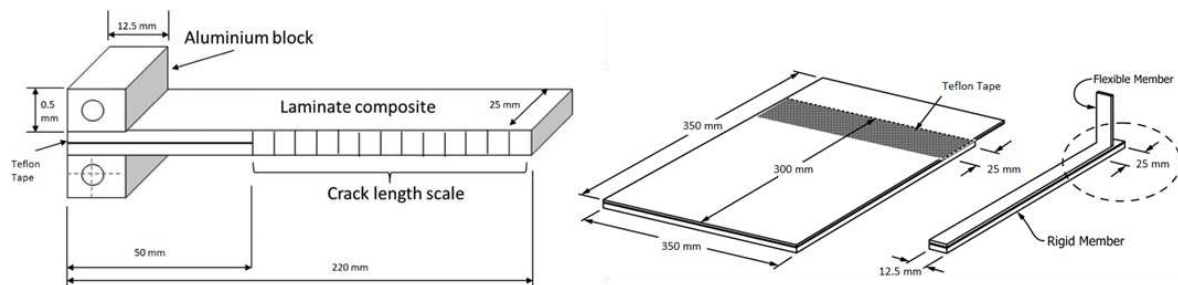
(Left) DCB and (Right) Peel test specimen dimension
